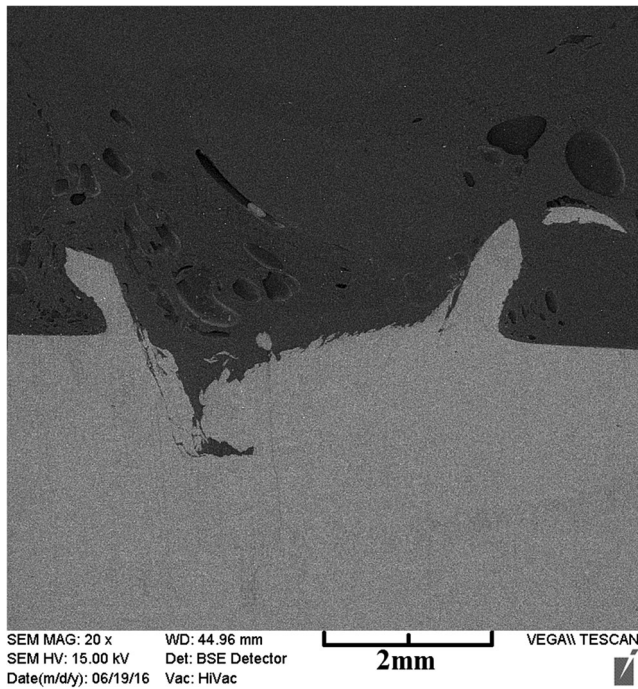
Internal materials flow pattern and macro-mechanical interlocking for the processed dissimilar weld at the tool tilt angle of 2° and plunge depth of 0.4 mm
